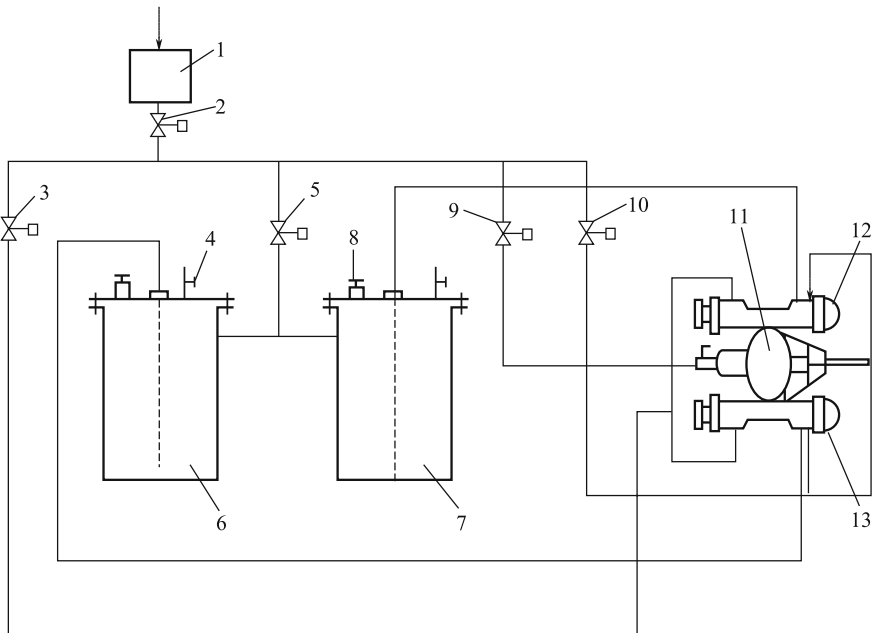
Schematic diagram of tank pressure jet 1—gas-water separator; 2—gas valve; 3—adjusting switch; 4—release valve; 5—adjusting valve; 6, 7—pressure tank; 8—safety valve; 9, 10—adjusting switch; 11—fiber cutter; 12, 13—resin injector
